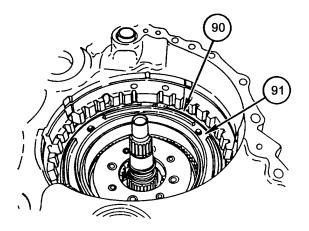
Third Clutch Piston Housing Assembly and Retaining Ring.
